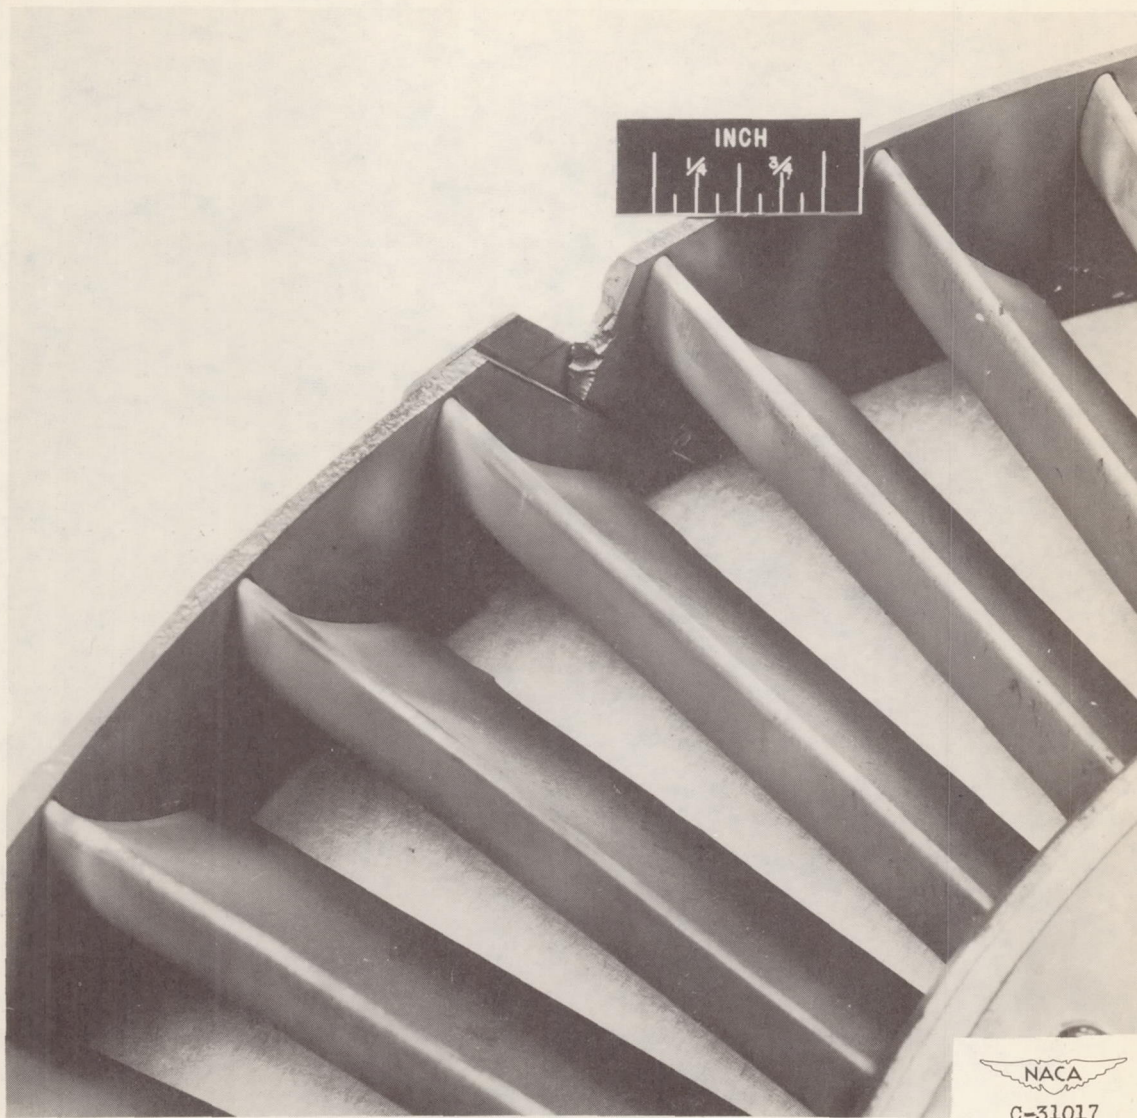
Nozzle diaphragm failure which caused airfoil failures; run 14.
